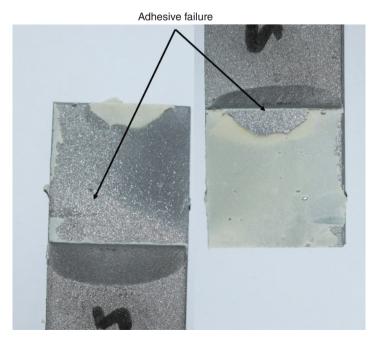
Mixed failure (cohesive and adhesive failure).
